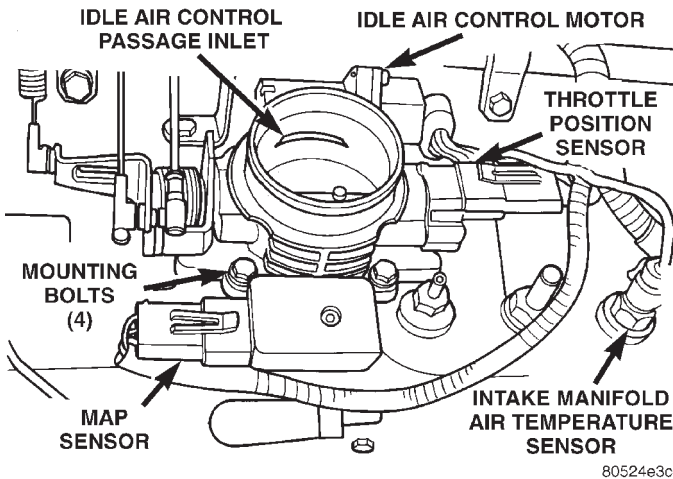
Intake Manifold Air Temperature Sensor—4.0L Engine
